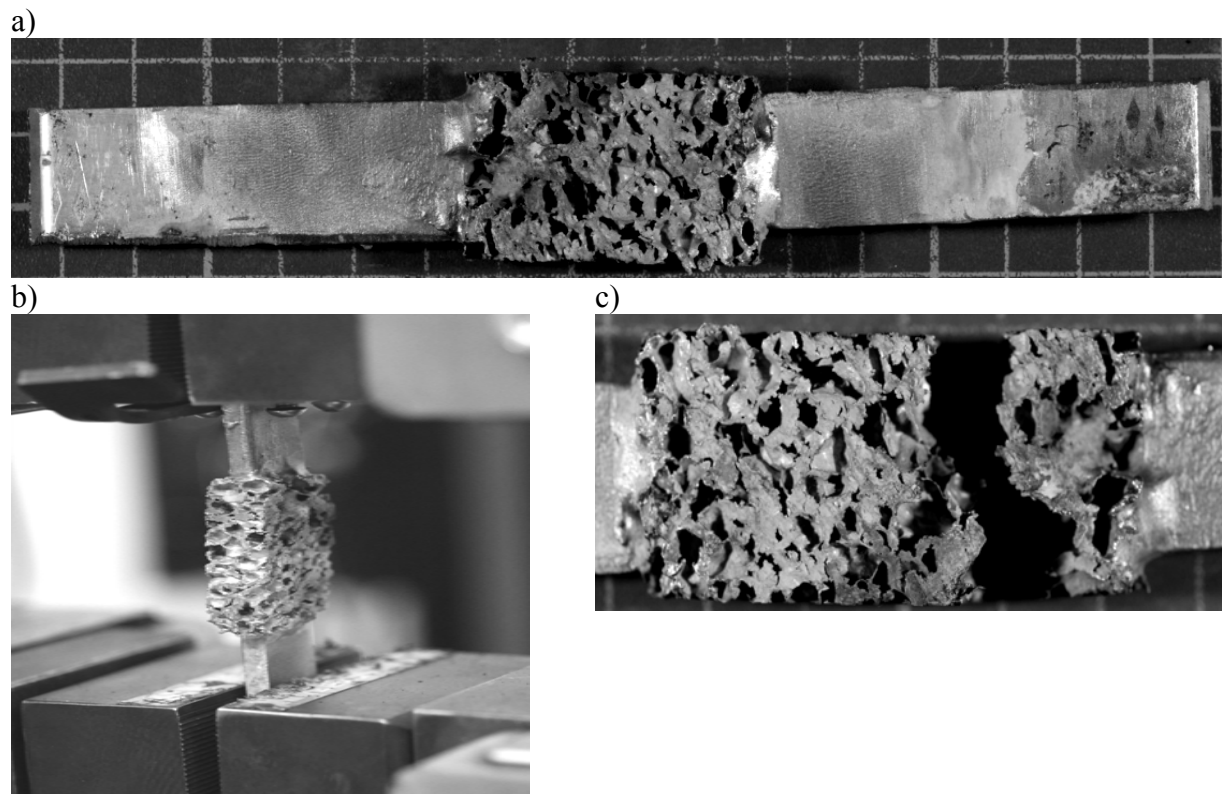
Soldered AISi foam - Al sheet metal specimen for static tensile testing: a) specimen construction b) a specimen mounted in universal testing machine fixings, c) specimen destructed during the test
